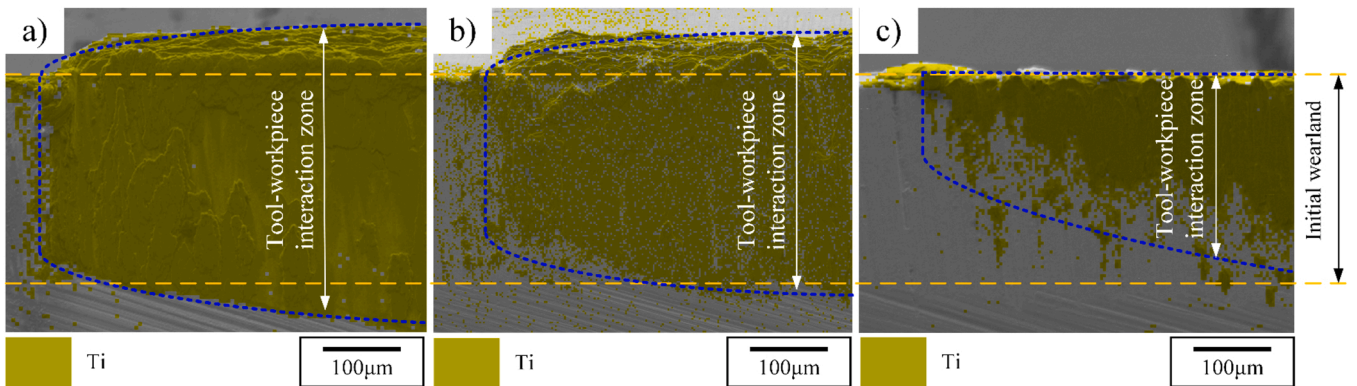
Tool-work interaction from the view of flank face with different cutting conditions, a) AD0, b) AF0 and c) AC0.
